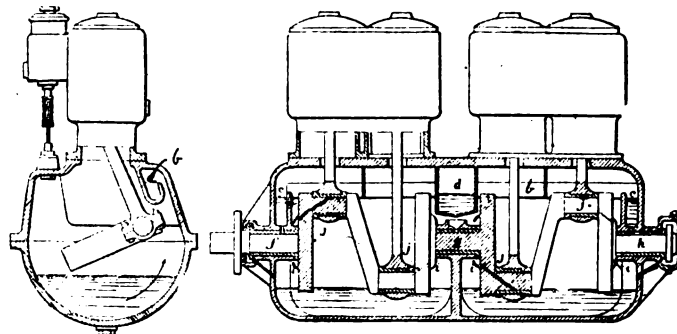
Section of Renault Four-Cylinder Motor, showing Lubricating Arrangements.
